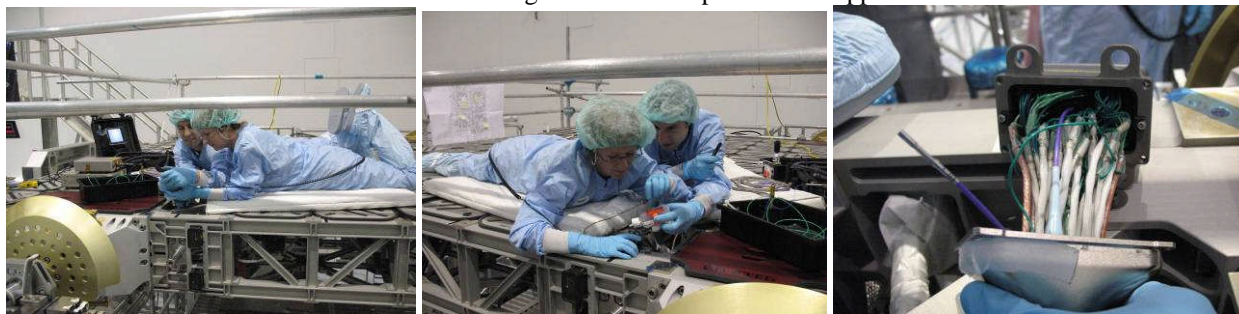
and b): Photonics group team works at integration on ELC Deck 2 @ KSC ISS processing facility, c) inside view of assemblies out of the back end of an ExPCA connector body.
